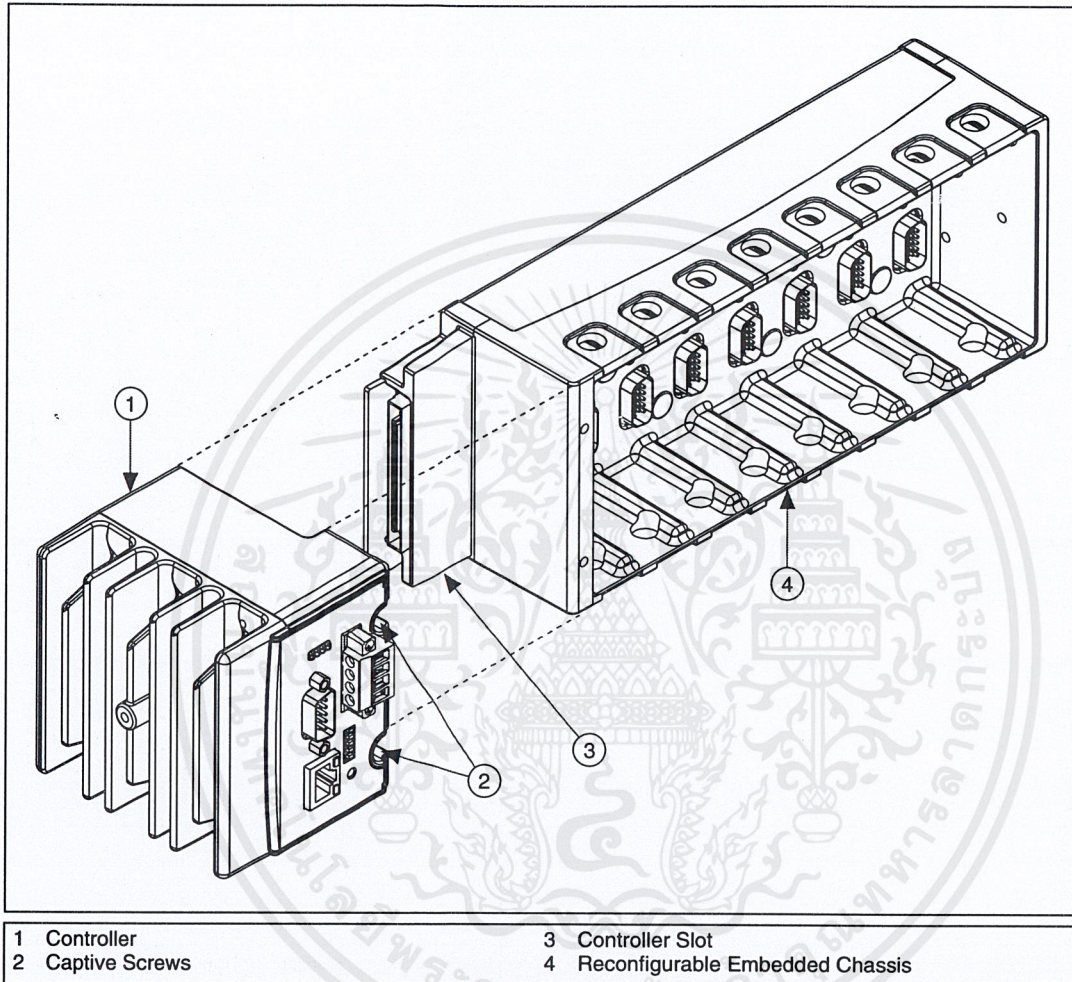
Installing the Controller on the Chassis (Eight-Slot Chassis Shown)
